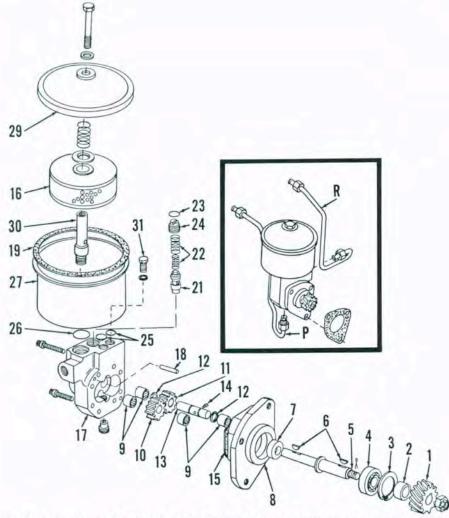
Exploded view of power steering pump used on Models MF230, MF235 and MF245 equipped with gasoline engine. Inset shows location of pressure line (P) and return line (R).
